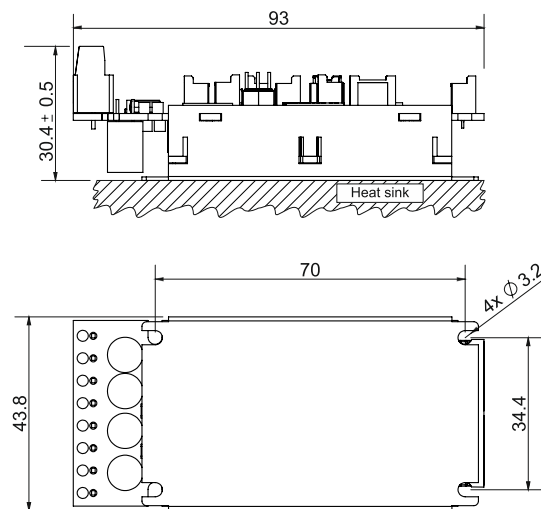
iPOS481x XZ-CAN drive dimensions
